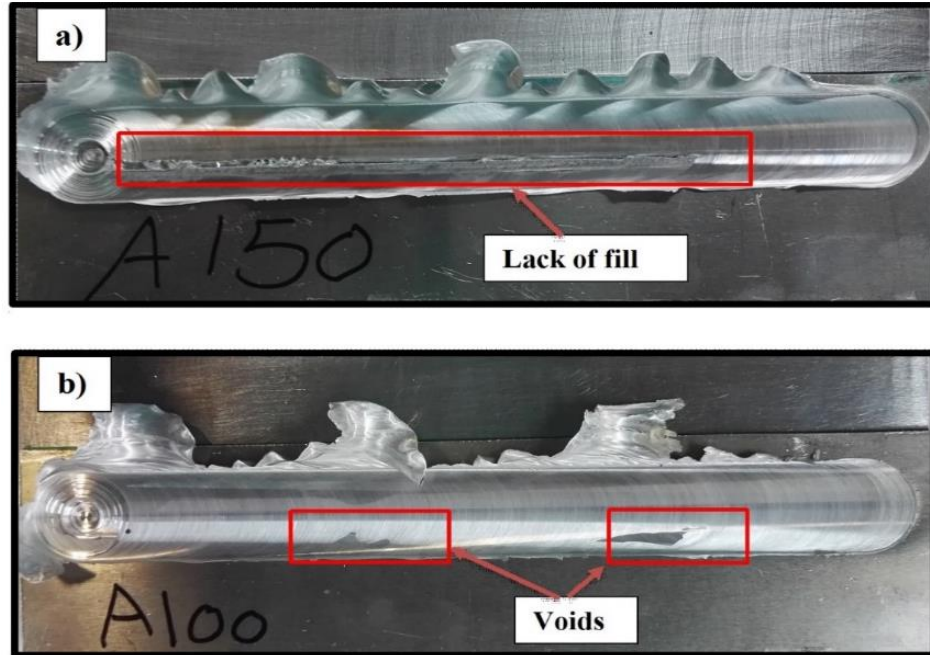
Surface defects of FSDC samples a) Lack of fill at sample A100, b) Voids formed at sample A 150
